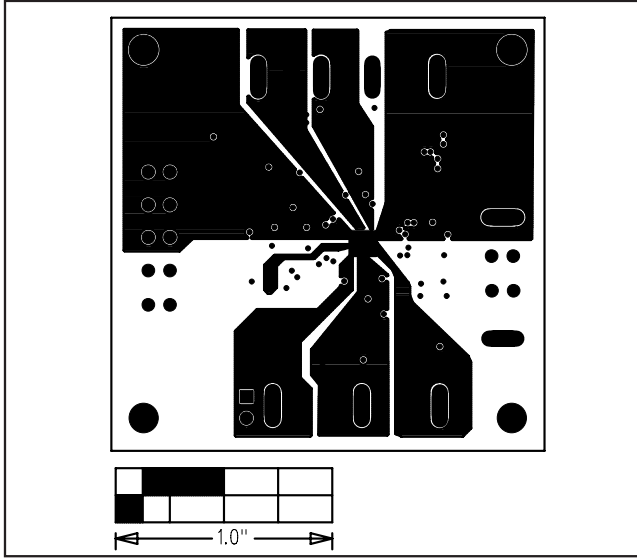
MAX8680 EV Kit PCB Layout—PGND Layer
